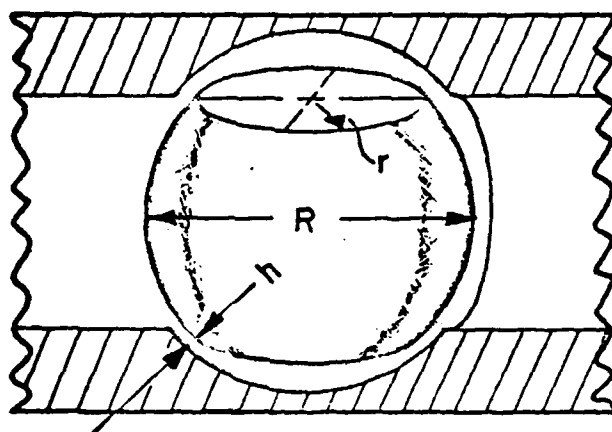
Sketch showing dimensions and positioning of the ball obturator within the spherical cavity.
